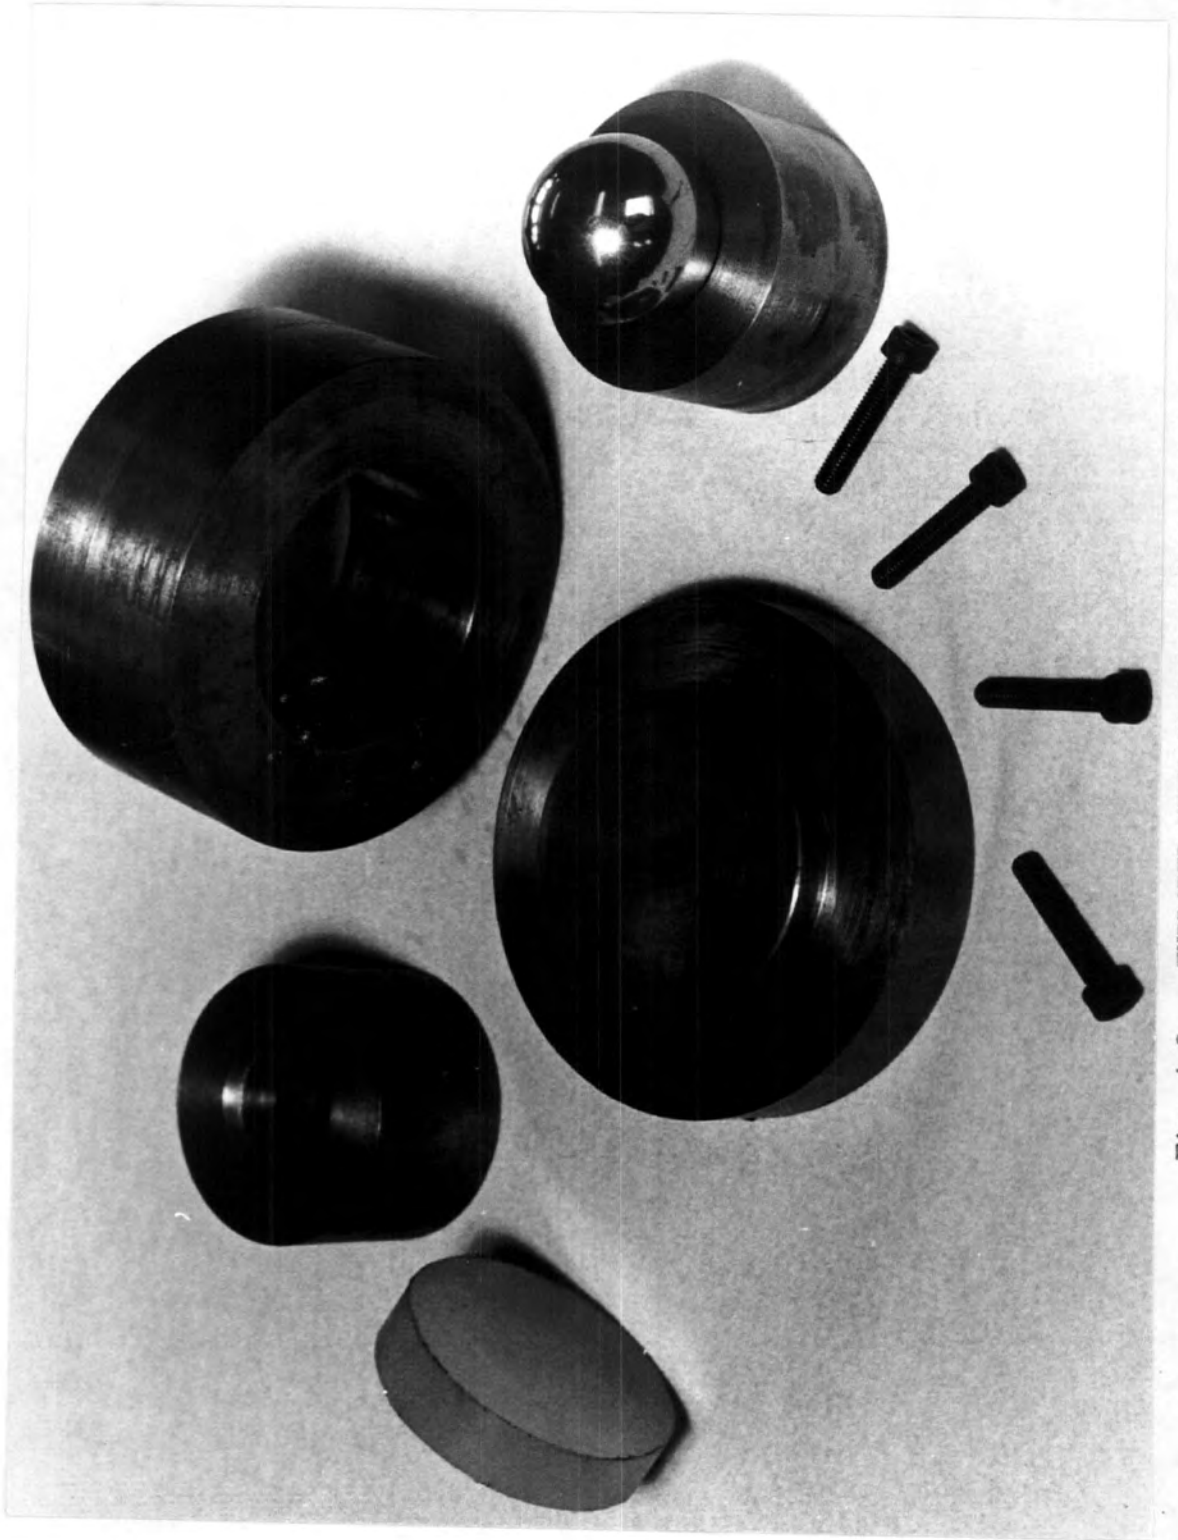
EXPLODED VIEW OF COMPRESSION CHAMBER
